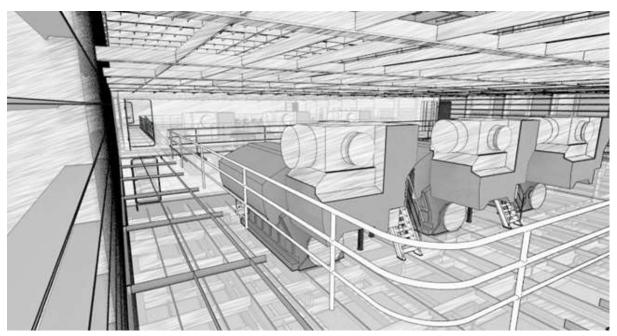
The Digital Twin enables Piping and Outfitting of an engine room in ship structural and general arrrangement views
